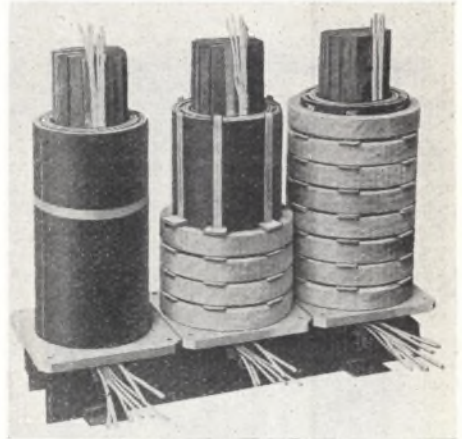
A small transformer in the course of erection, showing the insulated clamping board which clamps the h.v. winding only
